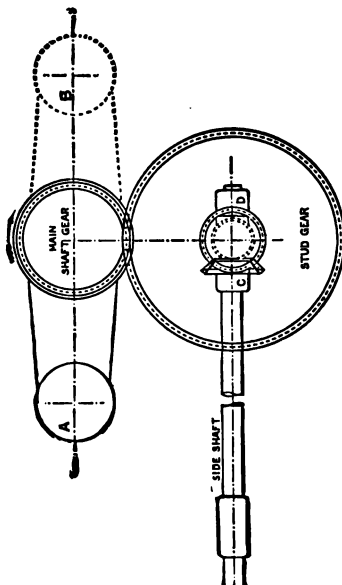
SIDE SHAFT AND GEAR, PUTNAM ENGINE.
